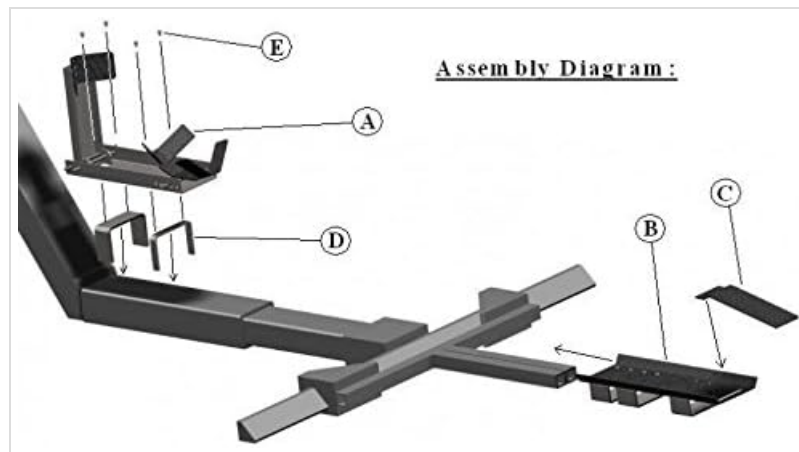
Exploded view assembly diagram. (A) Wheel Chock Assembly, (B) Platform Base, (C) Ramp, (D) U-bolts for securing, (E) Pins for adjustment.
